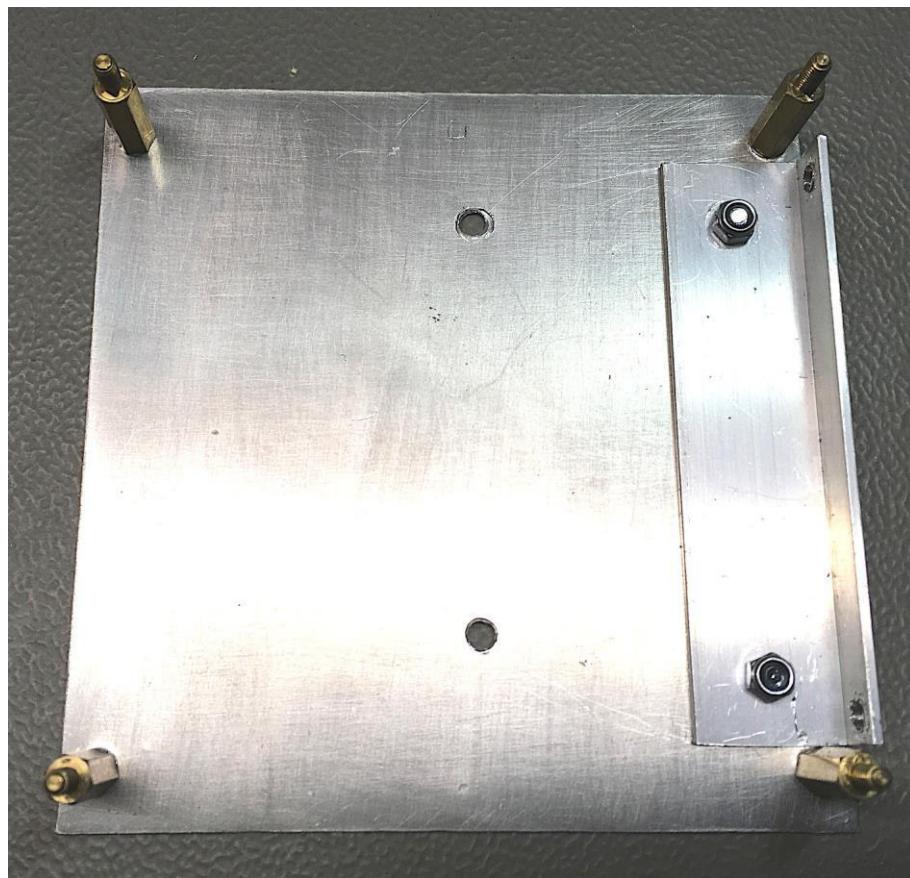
Mounting plate with angle profile (viewed from the PCB side)
